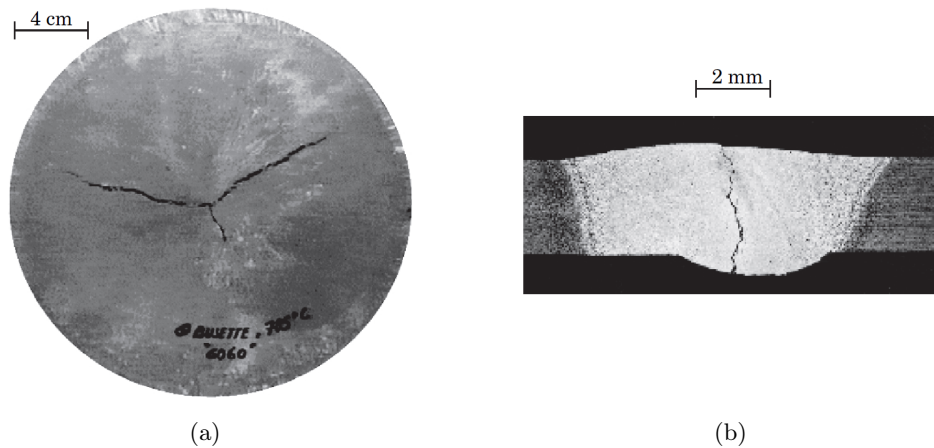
Hot tears observed (a) at the center of a DC cast Al 6060 billet (b) at the weld centerline of an aluminum alloy (after [8]).
